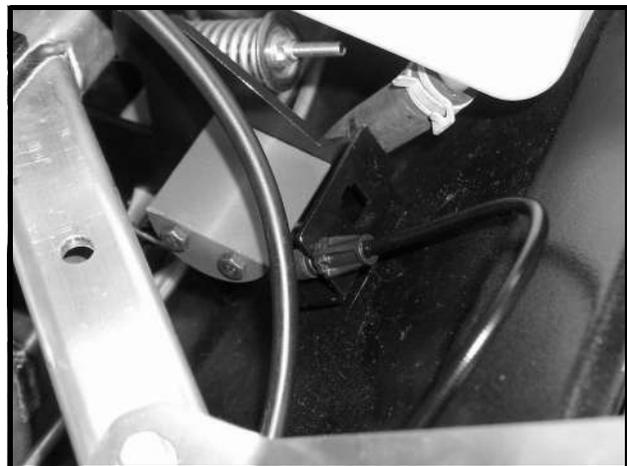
21 Accelerator Cable Pedal Bracket (Diesel Vehicles)
